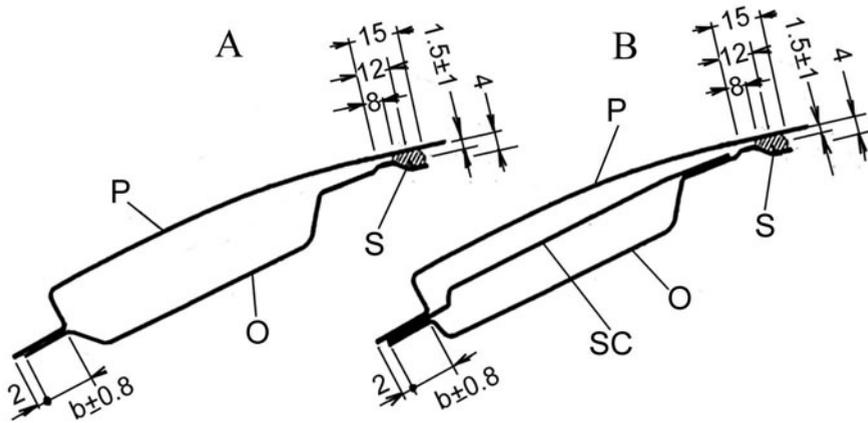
Examples of open (A) and boxed (B) sections of front roof cross member assembly. P: roof panel; O: inner frame; SC: boxing member; S: sealant.
